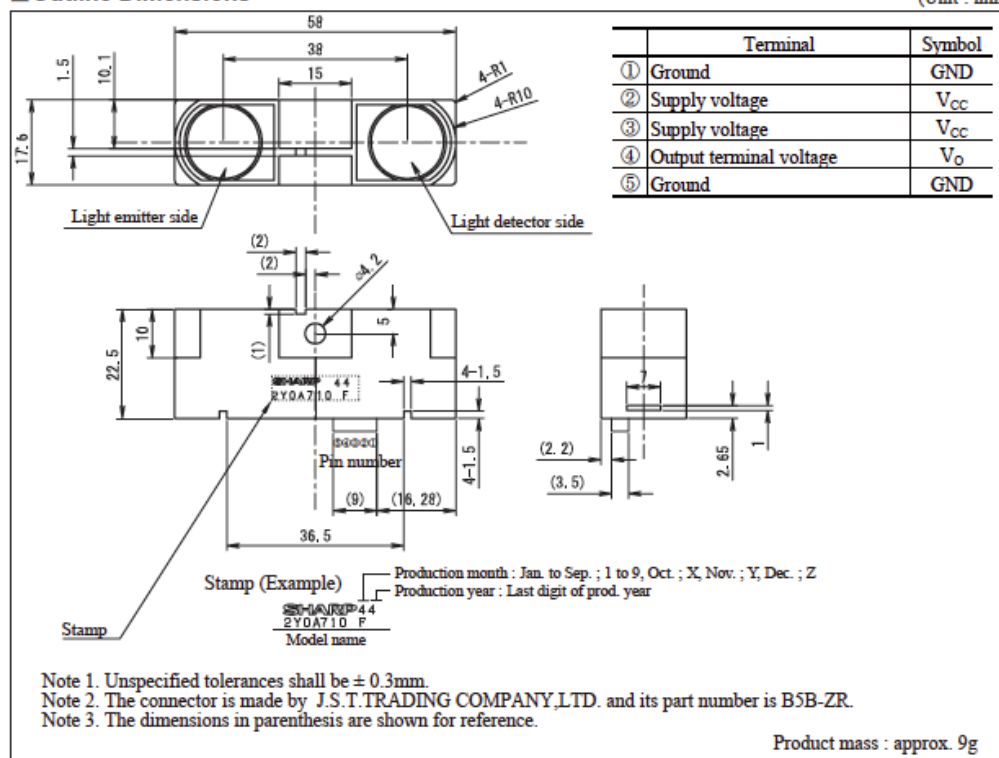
Sharp GP2Y0A710K0F IR Range Finder Technical Specification Sheet.
